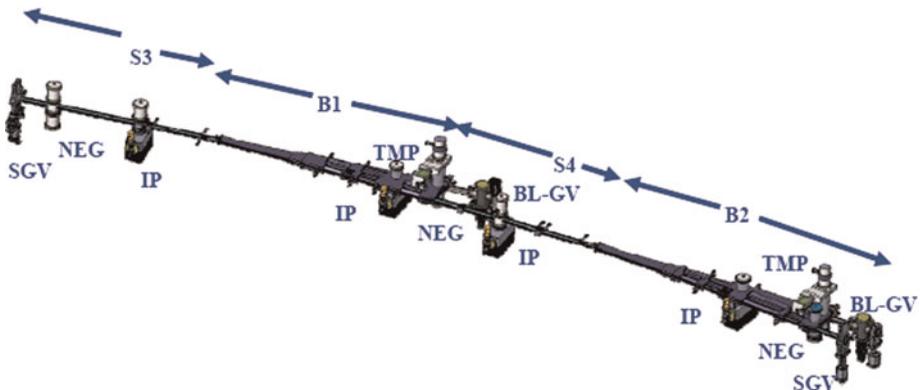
Assembly drawing of vacuum system in one unit cell.
